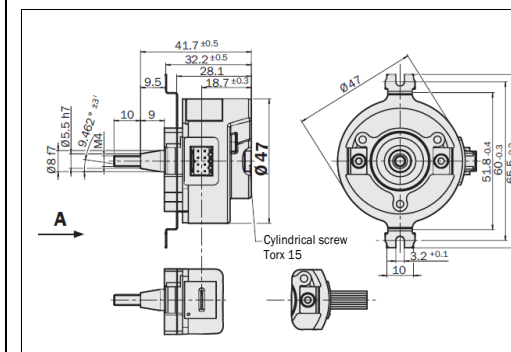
Dimensional drawing of SRS50S/SRM50S, conical shaft, spring plate
